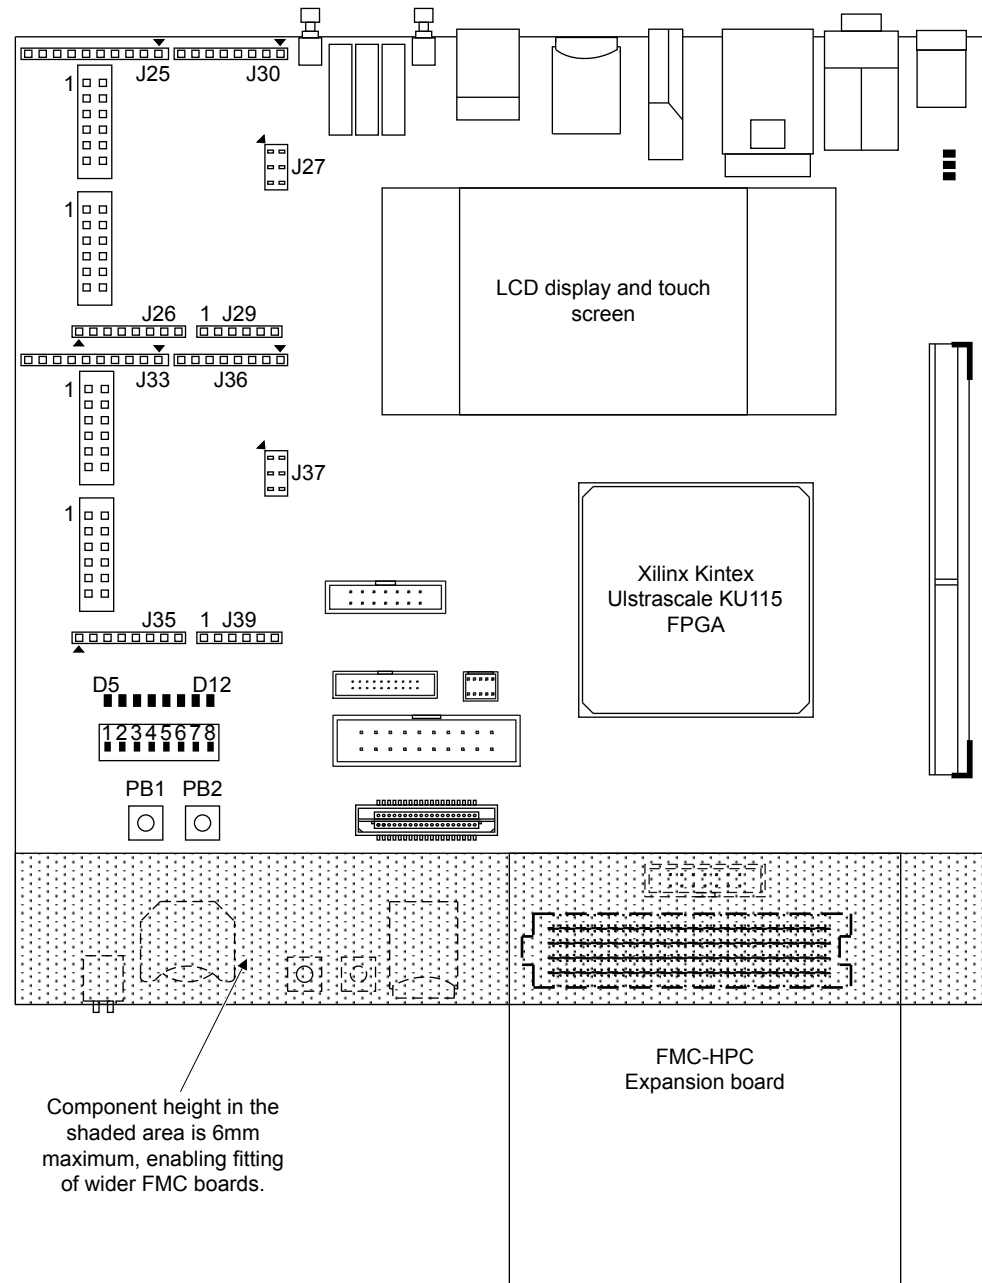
FMC-HPC board fitted to the MPS3 board FMC-HPC expansion connector
